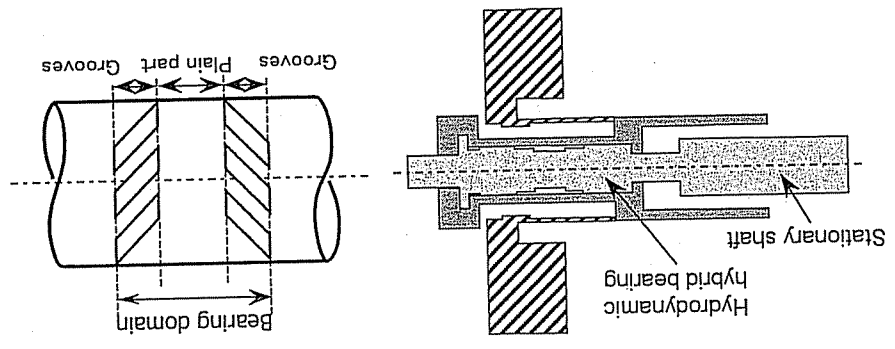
Hydrodynamic hybrid bearing of the stationary shaft
